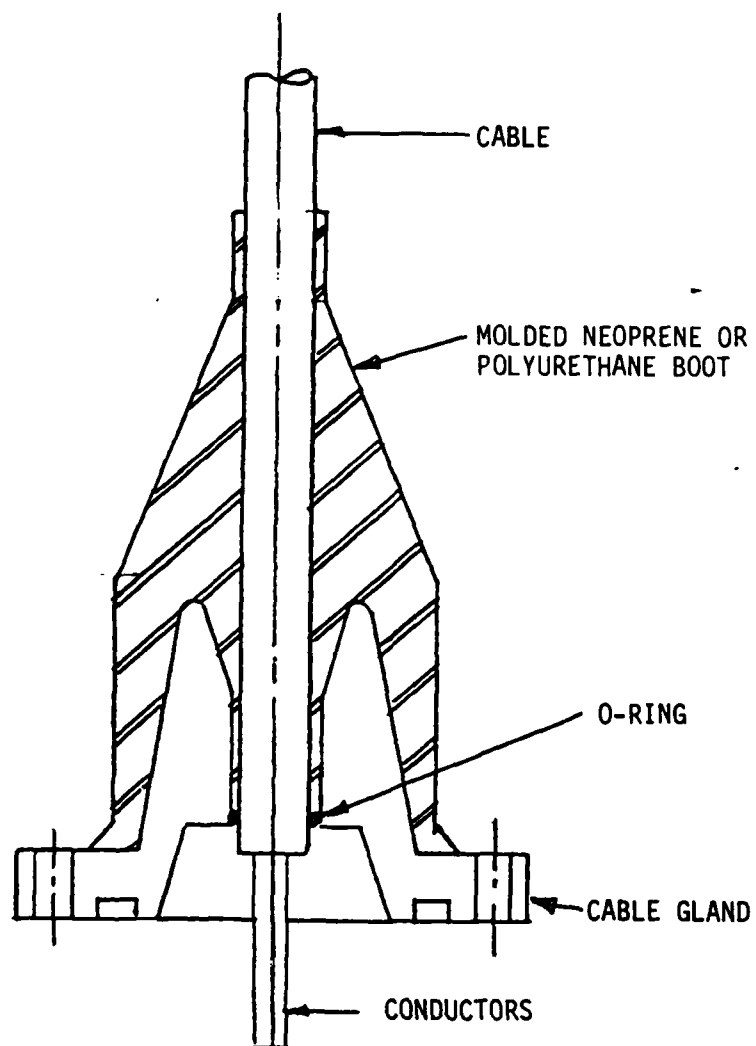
SONAR SYSTEM COMPONENT CABLE GLAND
